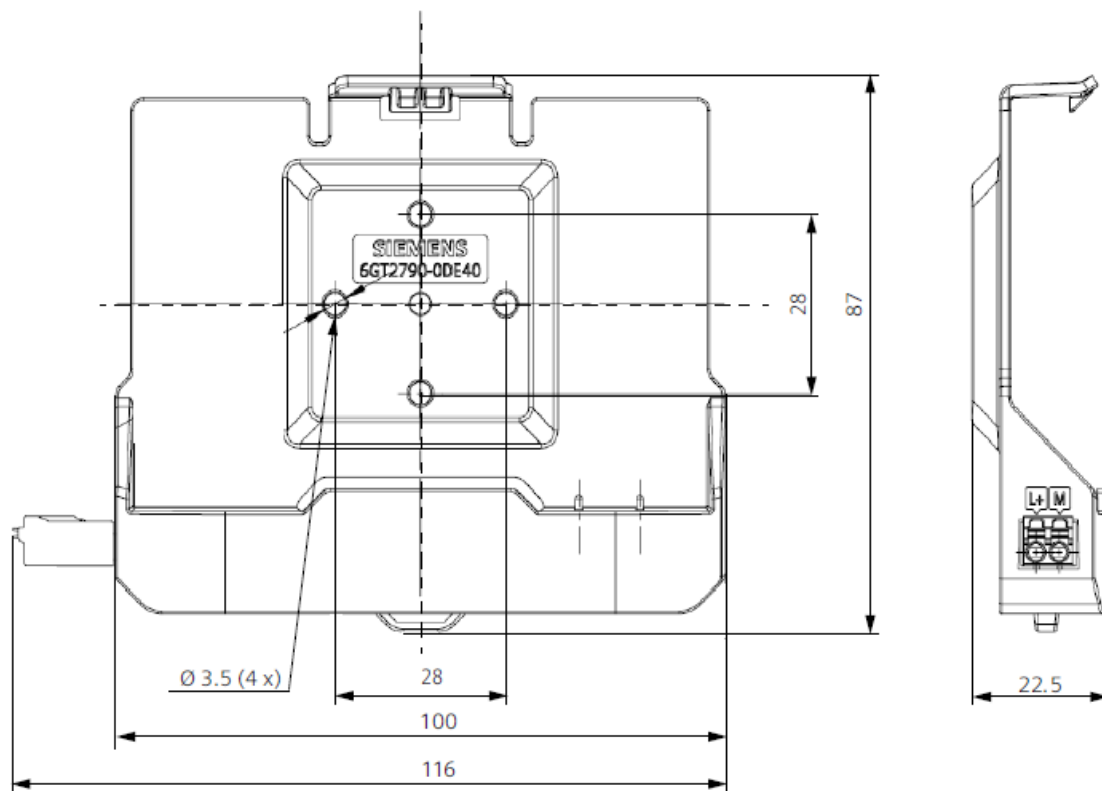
Dimension drawing of SIMATIC RTLS Power mounting clip for RTLS4083T (not included in product package) - All dimensions are given in millimeters
